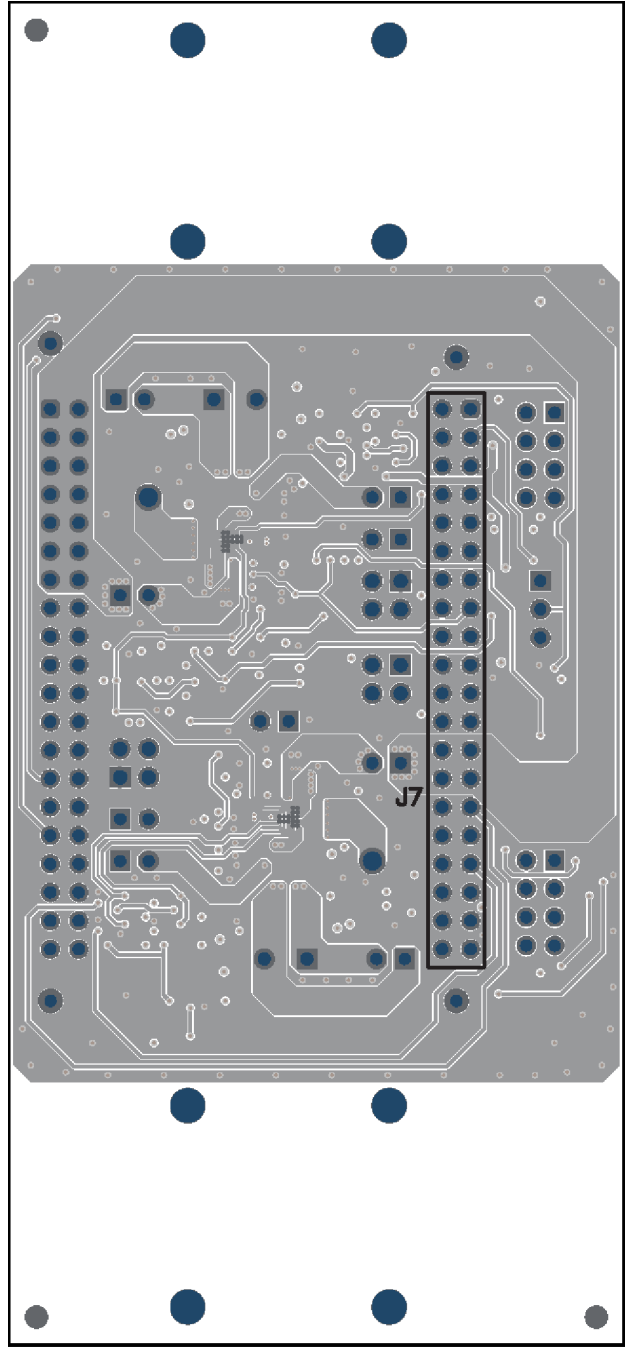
TAS2563YBGEVM-DC Bottom Assembly
